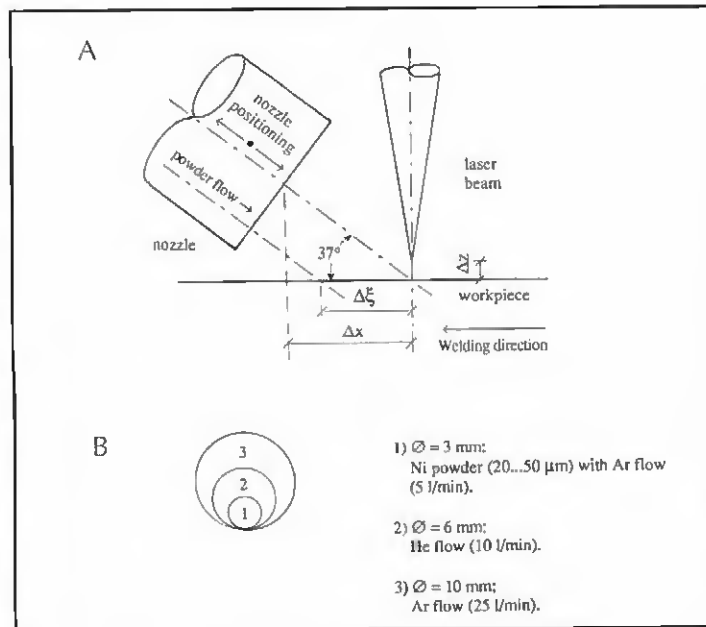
A — Sketch of the LBW process; B — nozzle section.
